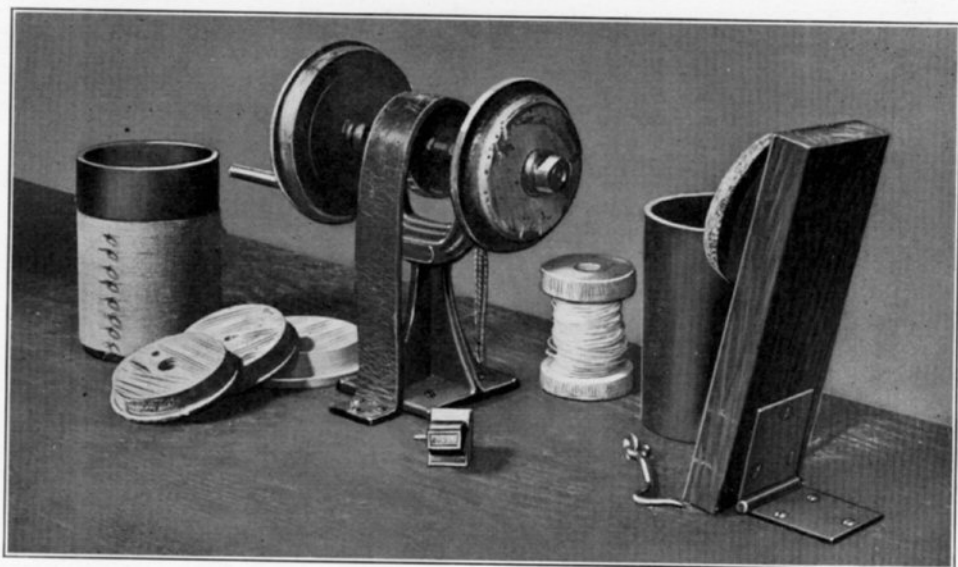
Parts for the winding rig. Wooden discs for various coils are shown, and the revolution counter, with its compressed tinfoil weight, detached from the shaft
